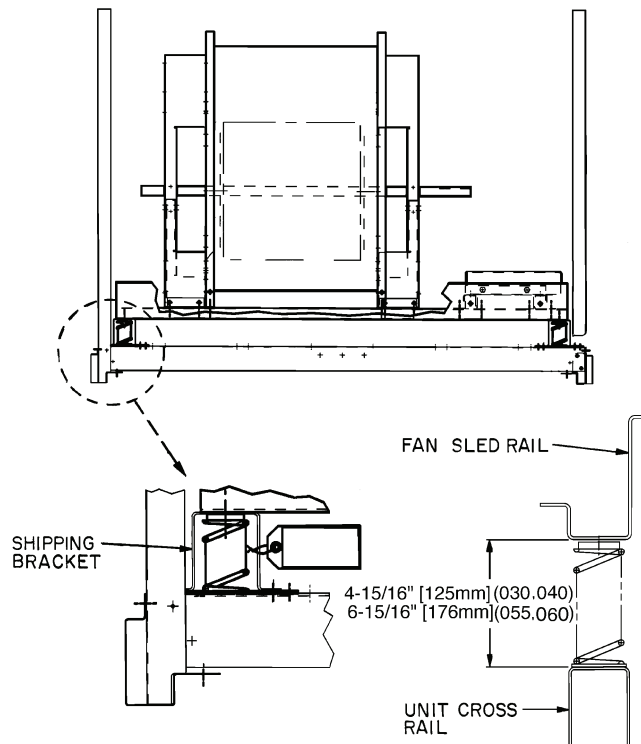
Shipping Brackets; 030-050 Units and Vertical Discharge 055-070 Units
